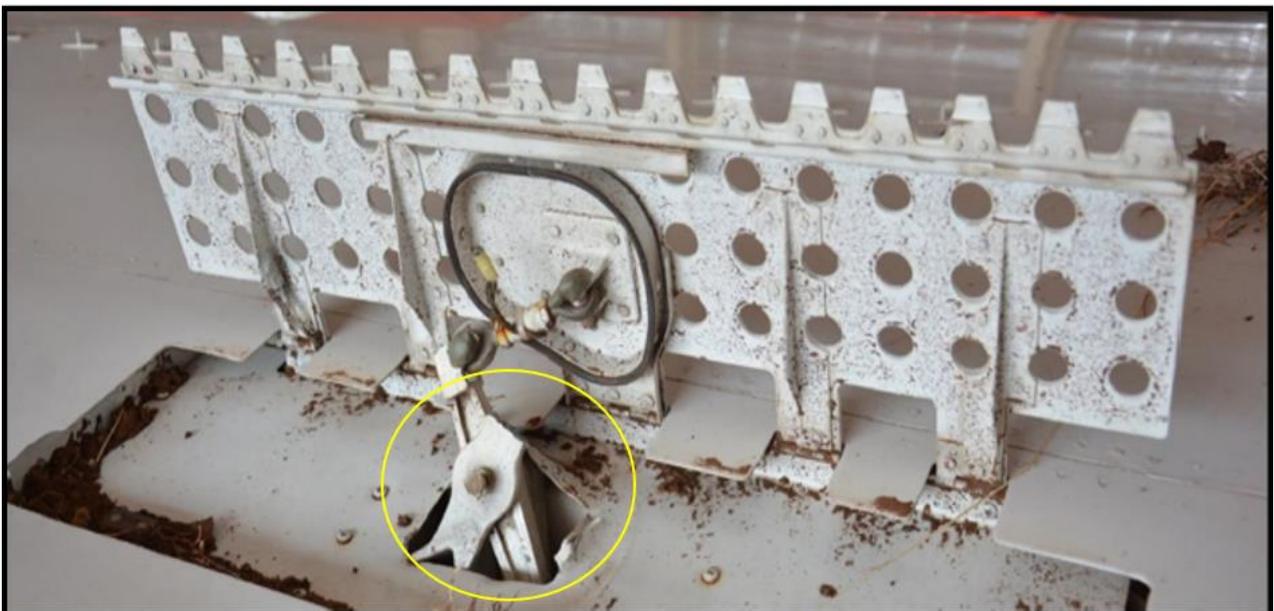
LH Speed Brake (failed bellcrank and damaged surrounding skin)
